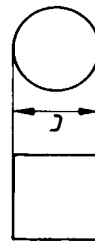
Optional spindle hole — Types in flange No. 2 (see 4.2)
